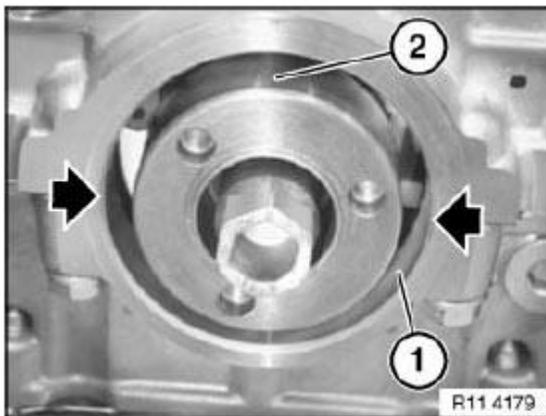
Identifying Sealing Surface And Running Surface For Crankshaft Radial Seal
